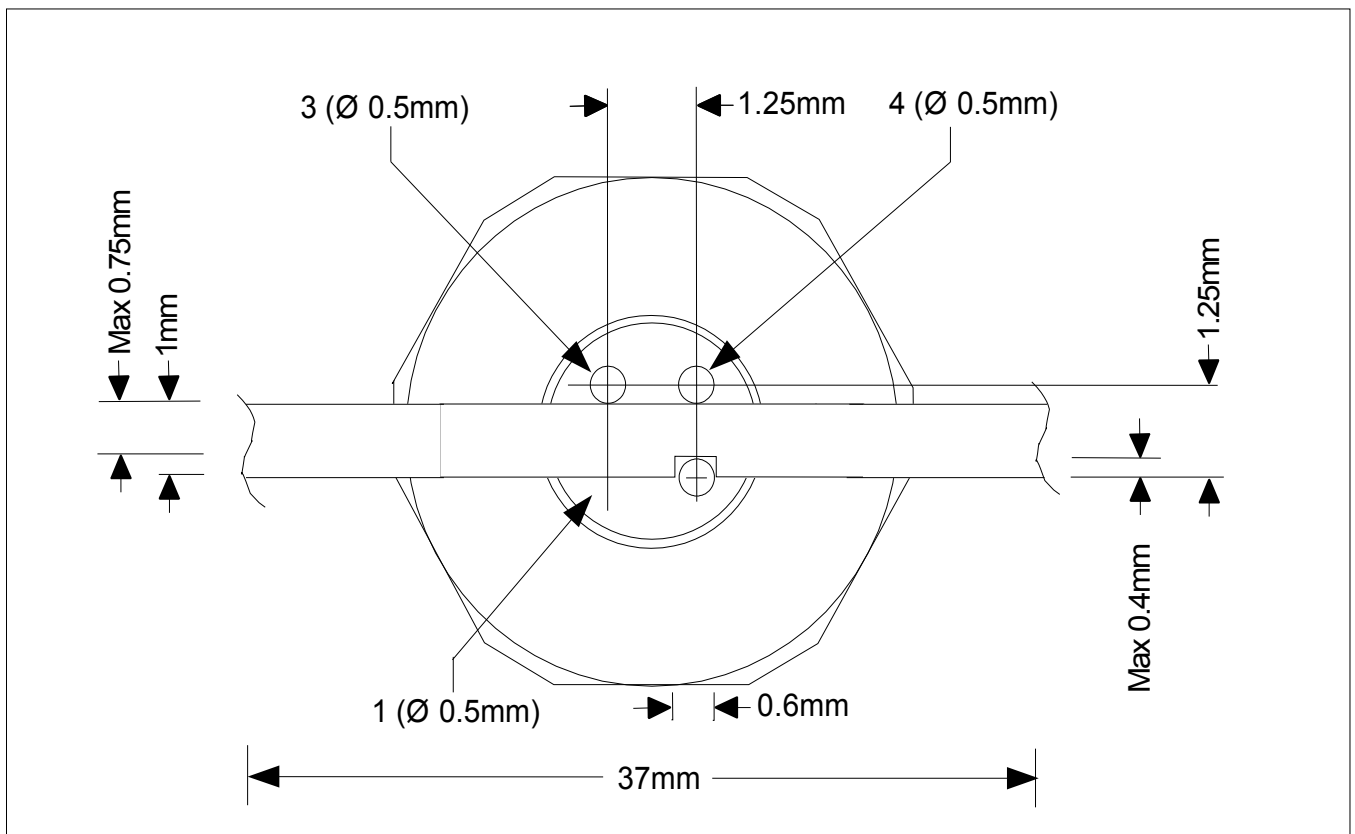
IEC-60947-5-2 Mounting to TM96.1 GENIE Explorer I VARIANT B
